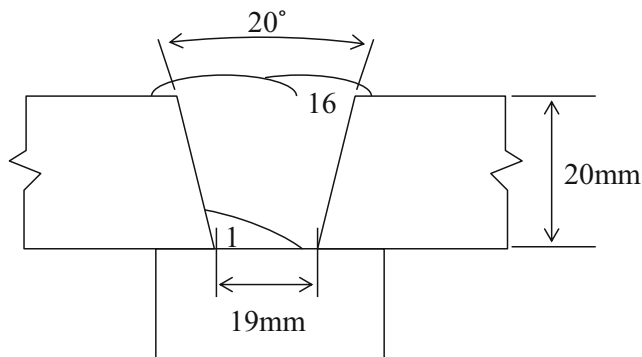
Welding groove configuration and pass sequences for SMAW
